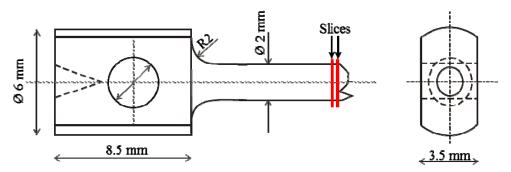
Cutting scheme of tensile specimen shank and slice position details.
